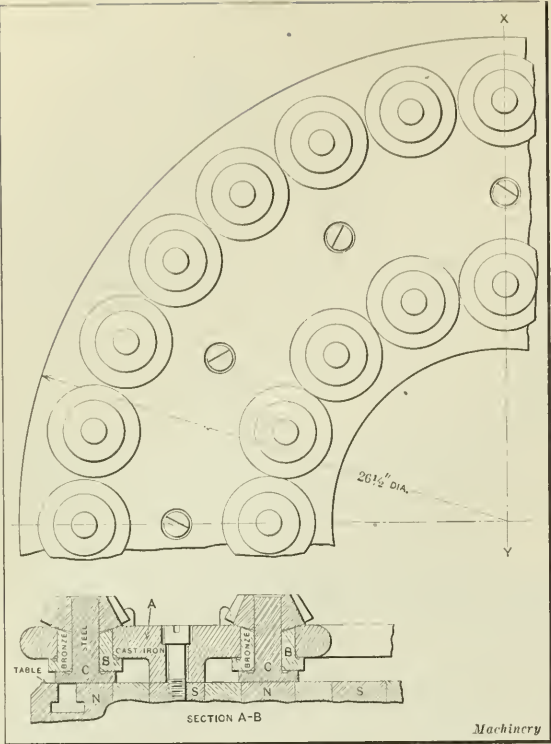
Magnetic Fixture for holding Bevel Pinions when grinding Top Face
